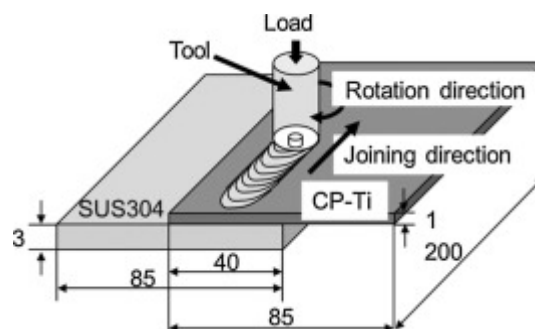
Schematic illustration of the setup and arrangement of specimens for FSW (in mm).
